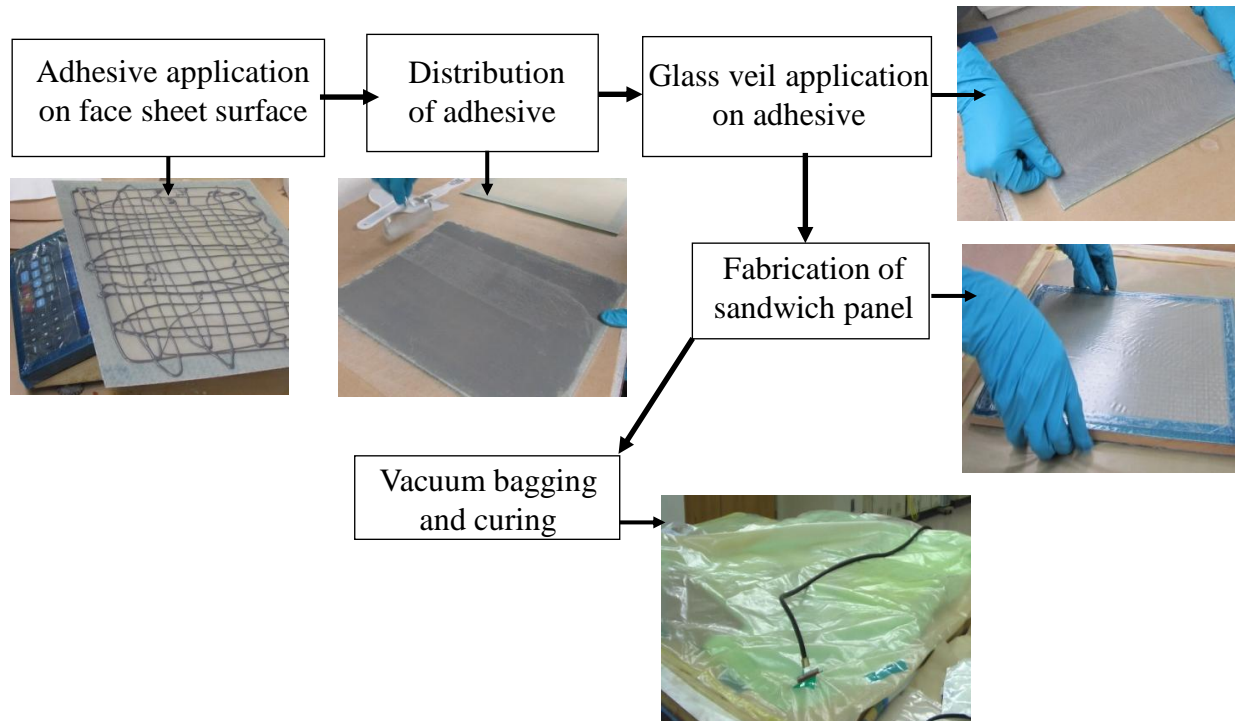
Steps for fabricating Eco-Core sandwich panel.
